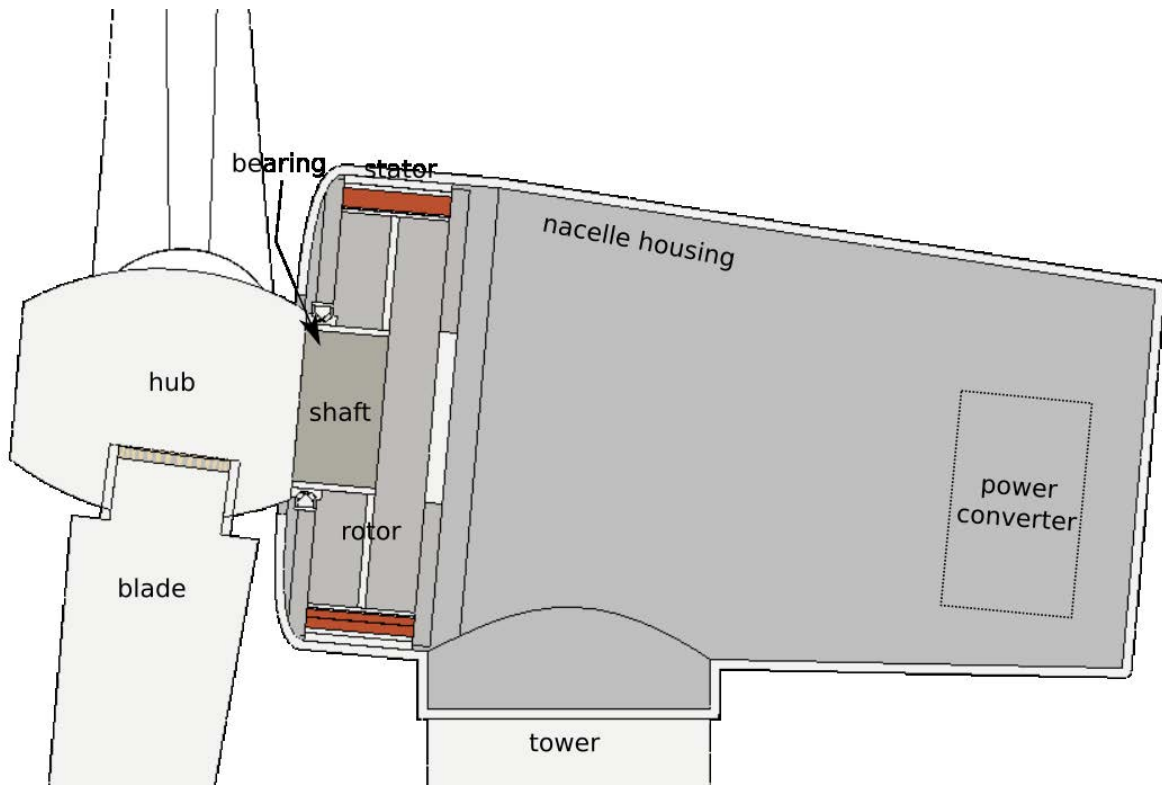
A cross-sectional view of the nacelle assembly showing the coupling between generator, shaft, bearing, hub and more. Note that for illustration reason, dimensions are exaggerated
